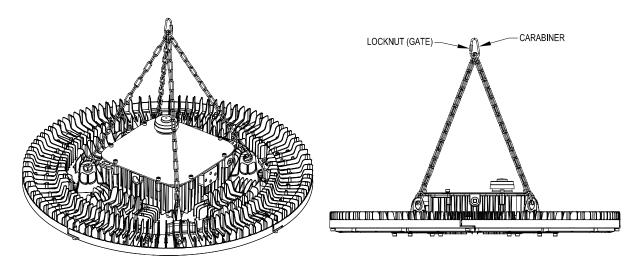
MOUNTING OPTIONS - CHAIN MOUNTING
